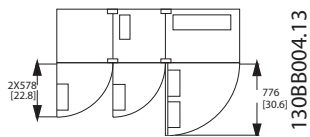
Space in front of IP21/IP54 enclosure type, frame size F3
